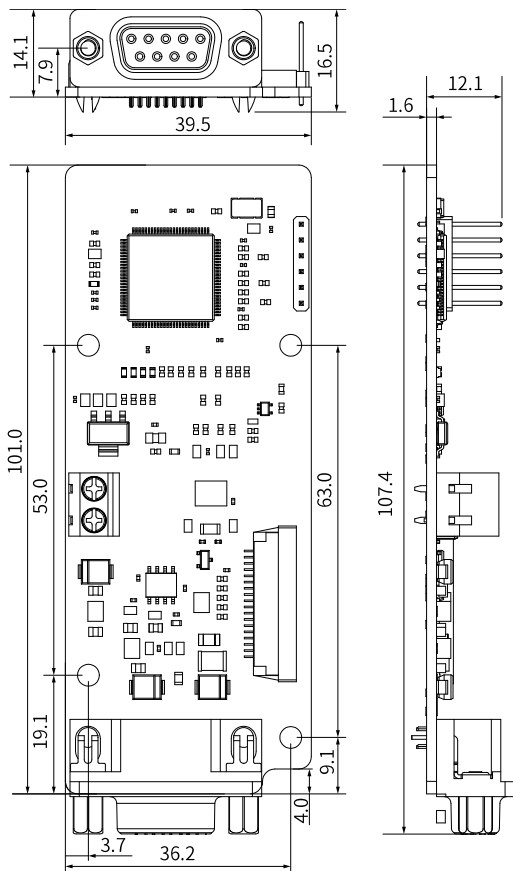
ES510-PG-CT1 card dimensions (unit: mm)
